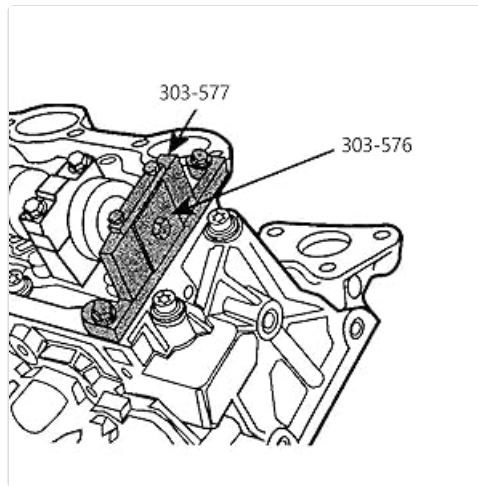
The 303-577 and 303-576 tools engaged with the camshaft.
